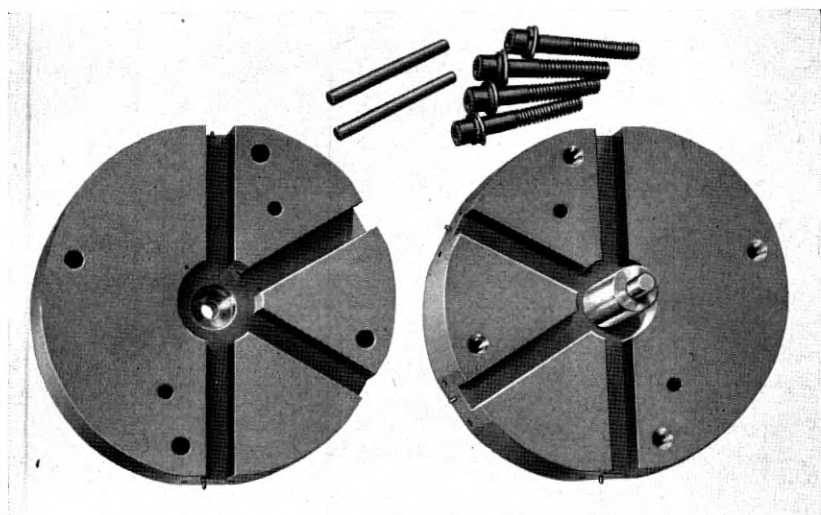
$1\frac{1}{2}\lambda$  ring—4 arm—photograph of machined test sample.
